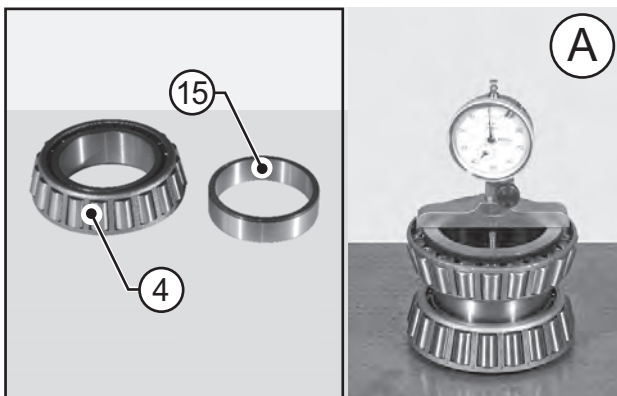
Introduce a spacer (15) and thicker calibrated spacer between bearings. Reset the depth gauge on pinion bearings (4)(16) and pinion spacer arranged (15) as in the figure above.
